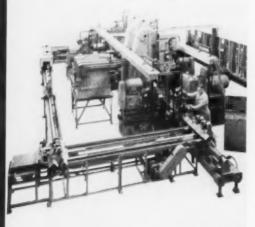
Overall view of Barnes Special 10-Station Progress-Thru Machine, showing operator of the machine's loading station. Note transfer plates turning from the unloading station to the loading station of the machine.
